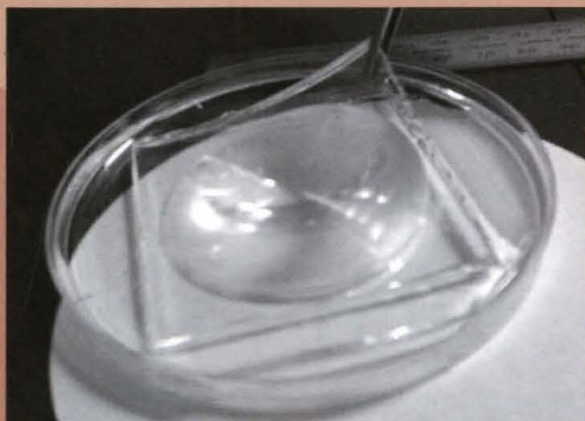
Removing a fresnel lens from its mold. The fresnel lens can be molded from an existing glass lens.
